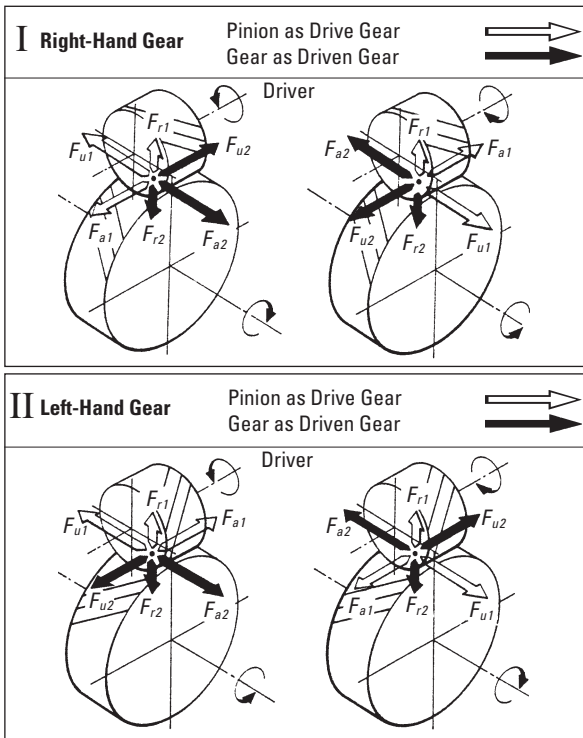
Directions of Forces in a Screw Gear Mesh
